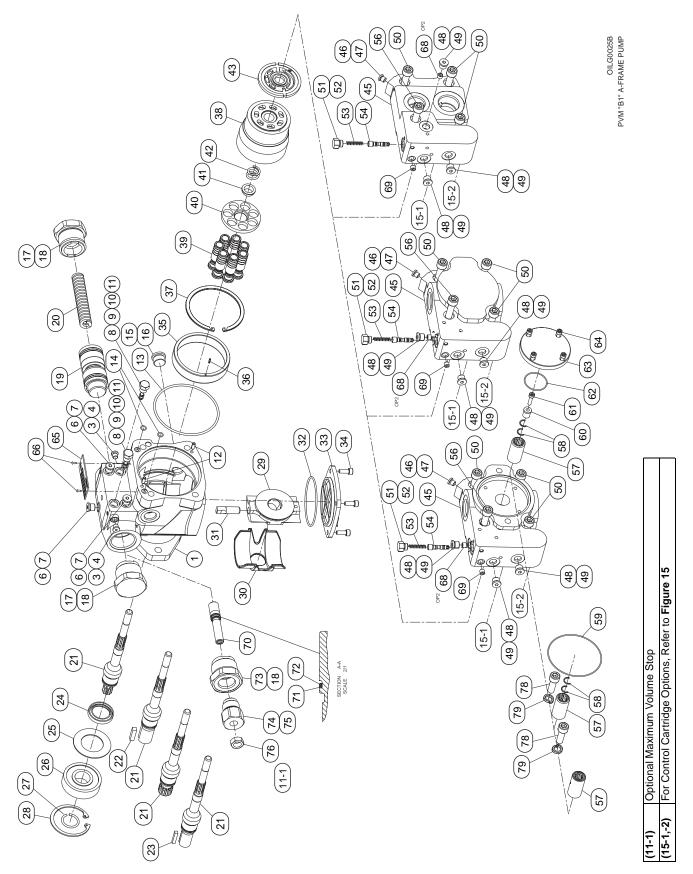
B. Exploded Parts Drawing for PVM-011/-014/-022 A-Frame (519272-104 sheet 2)
